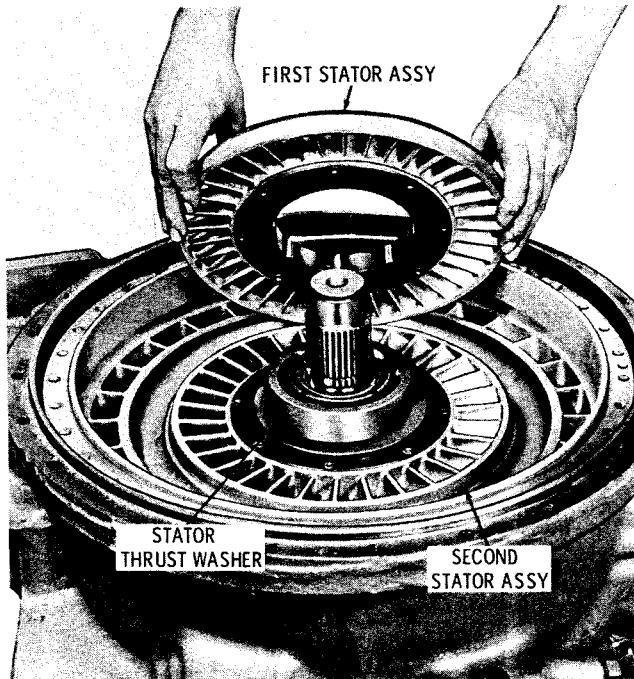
Installing first-stator assembly (5630, early 5631 models)
